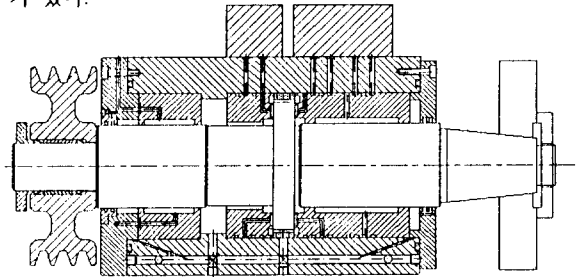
Spindle Assembly with Hydrostatic Bearings
